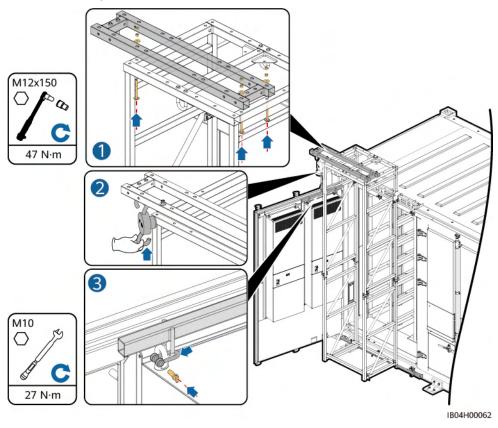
Installing the air conditioner hanging truss (replacing the inner air conditioner)
